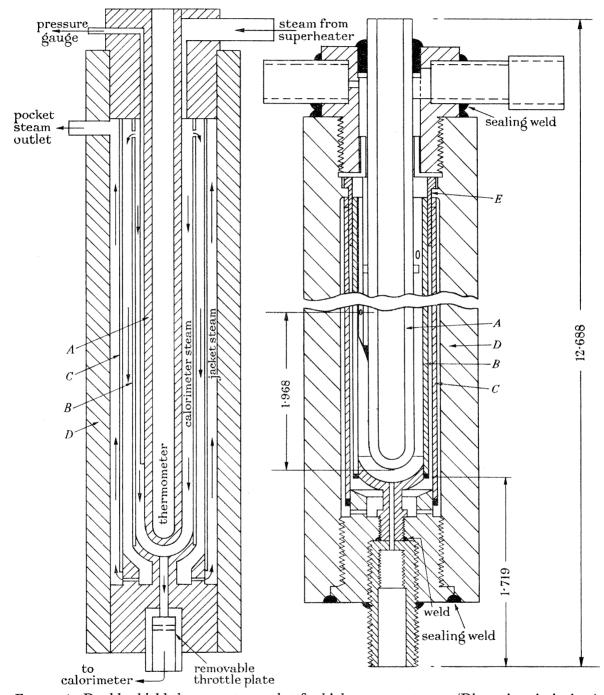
Double-shield thermometer pocket for high-pressure steam. (Dimensions in inches.)
